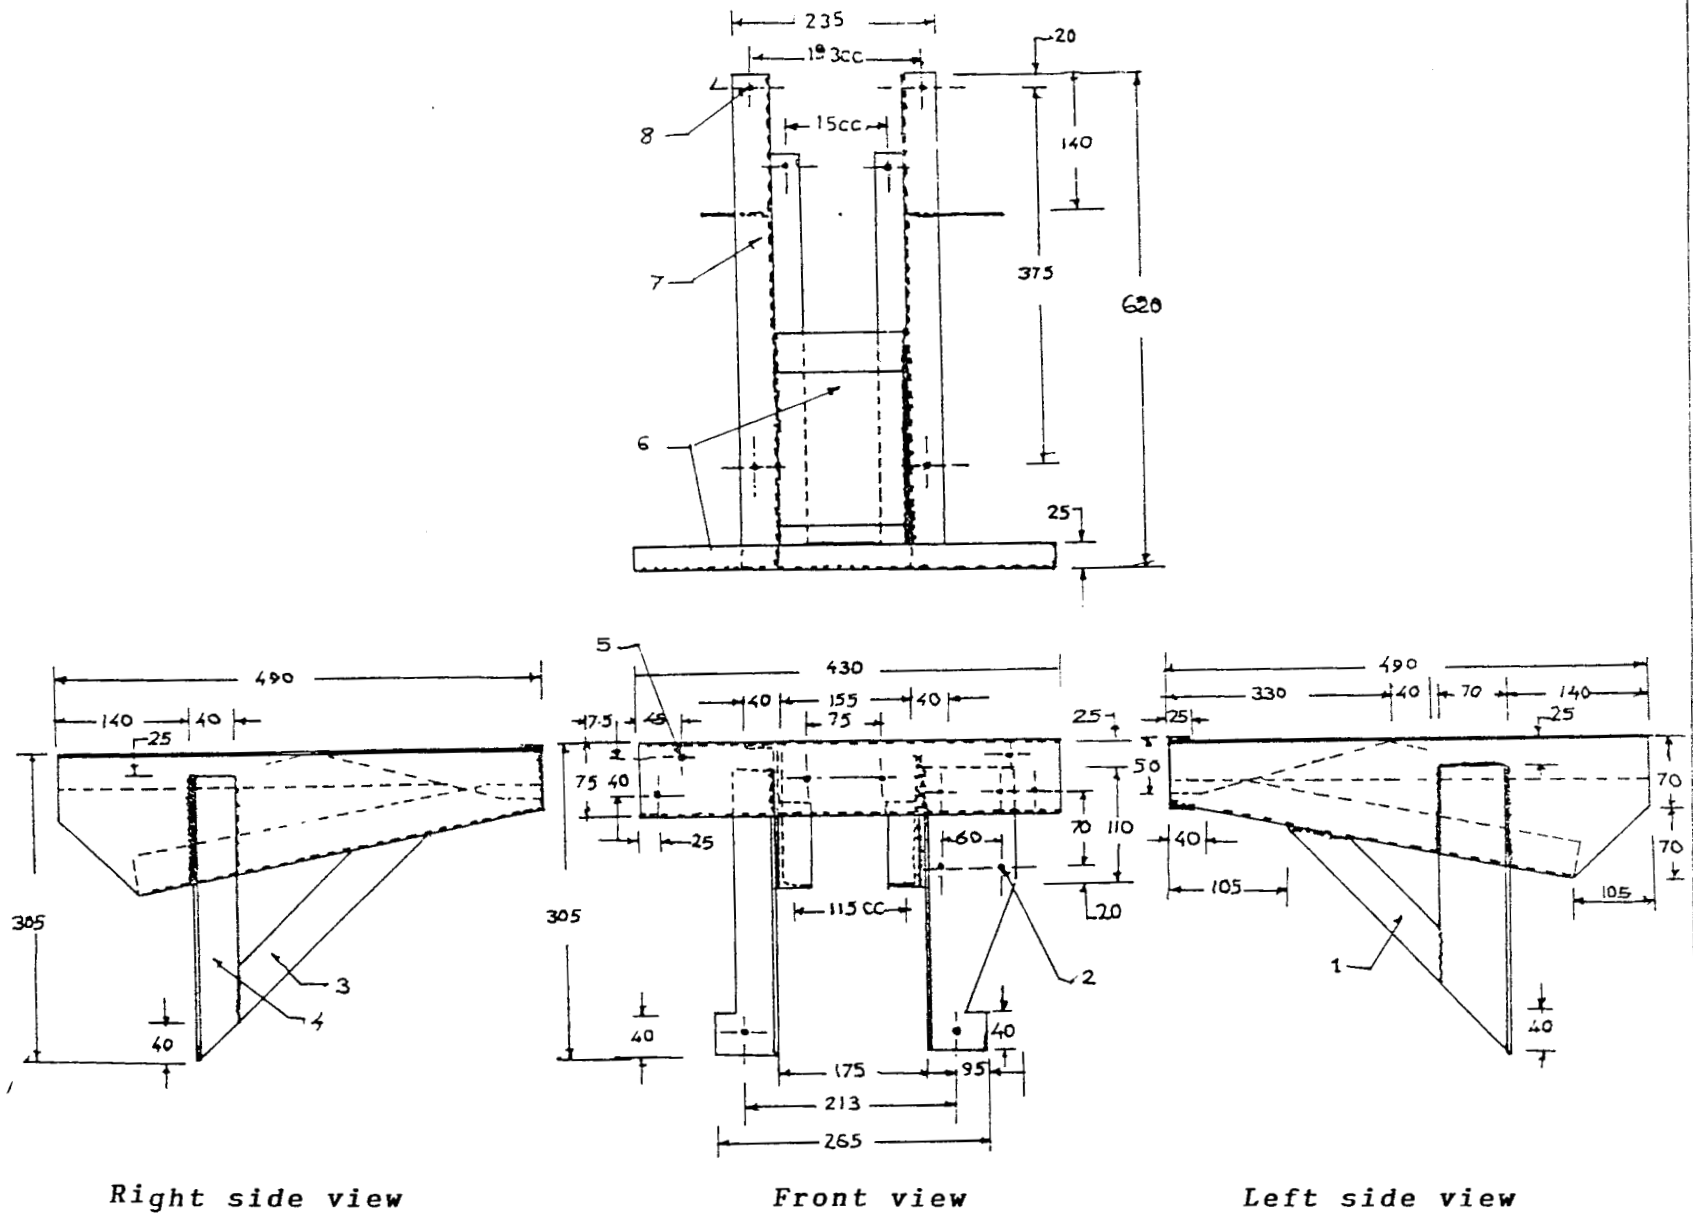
DETAILS OF NEWLY FABRICATED ENGINE CHASIS
